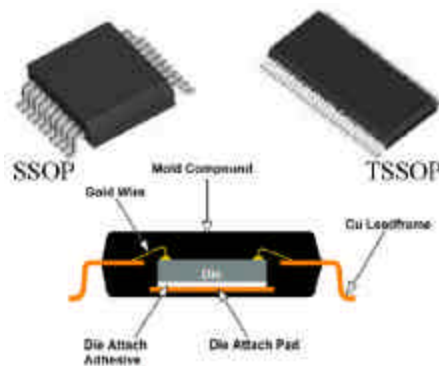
Illustration of SSOP and TSSOP packages and a package cross section.
